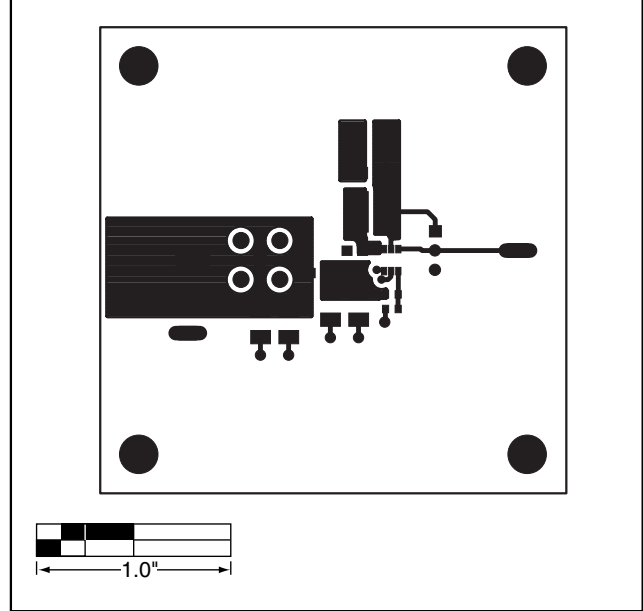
MAX5026 EV Kit PC Board Layout—Component Side
